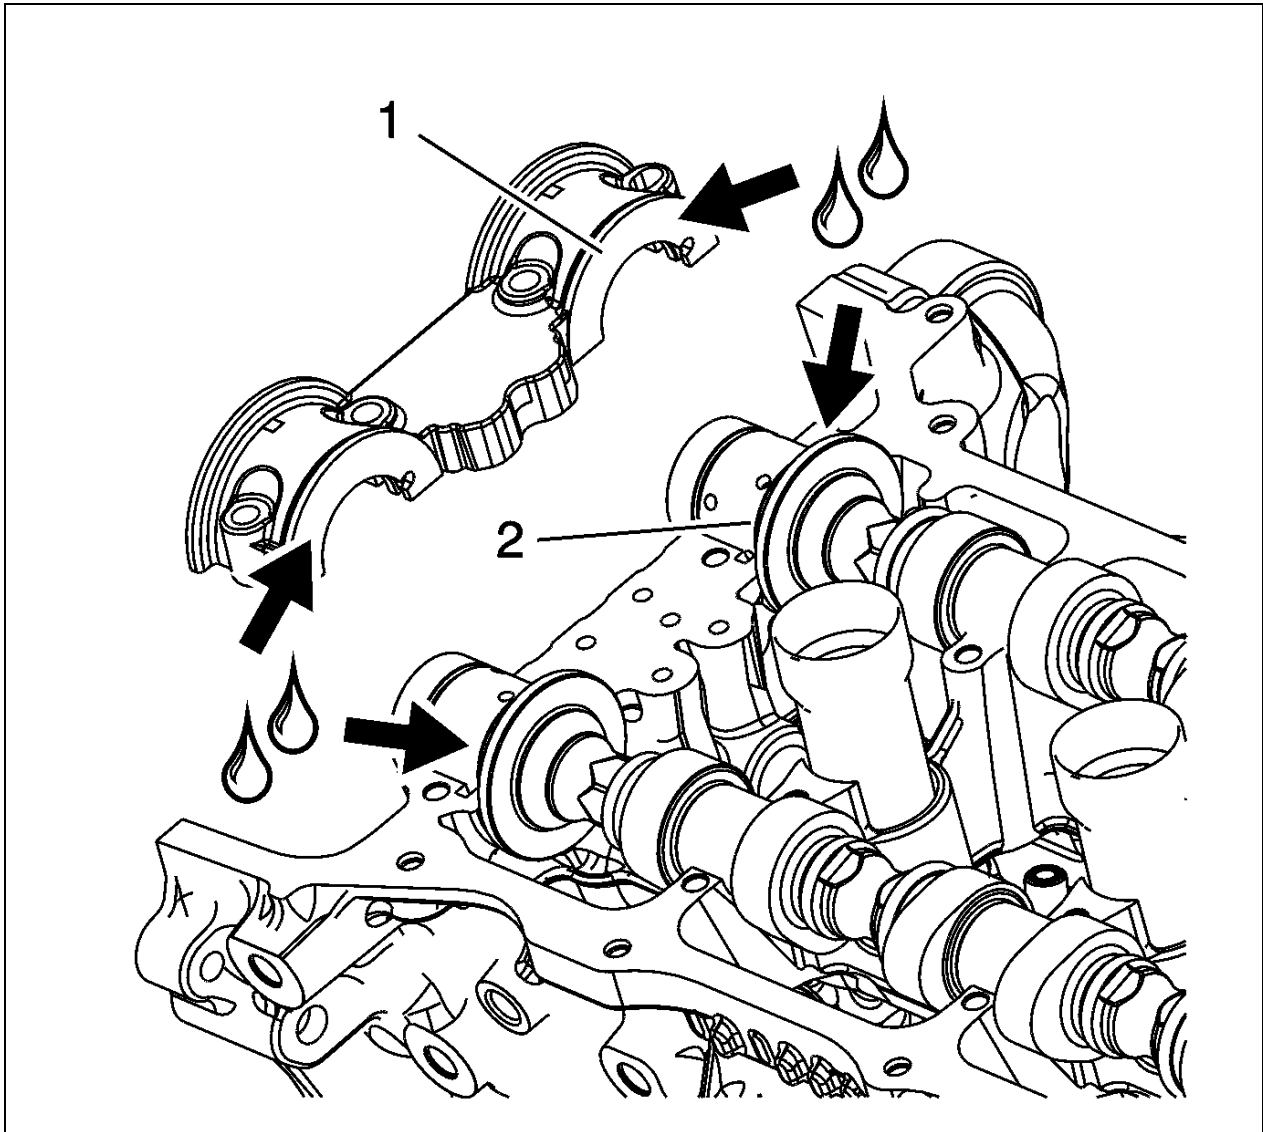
Left Cylinder Head Camshaft Bearing Cap Markings
